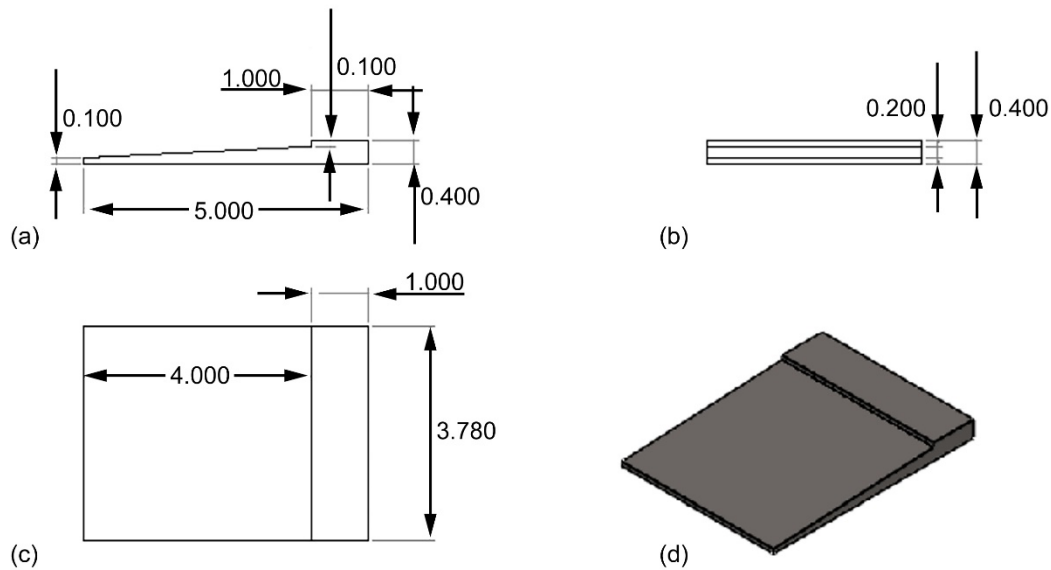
Thin generic fan blade fragment. Dimensions in inches. (a) Side view. (b) Front view. (c) Top view. (d) View of model.
